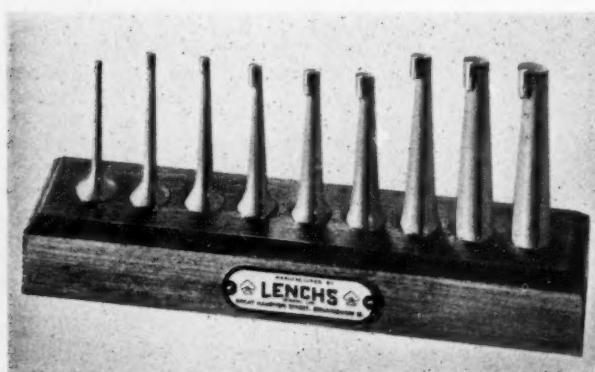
A Set of Jig Boring Tools Tipped with Oakaloy ES Cemented Carbide
